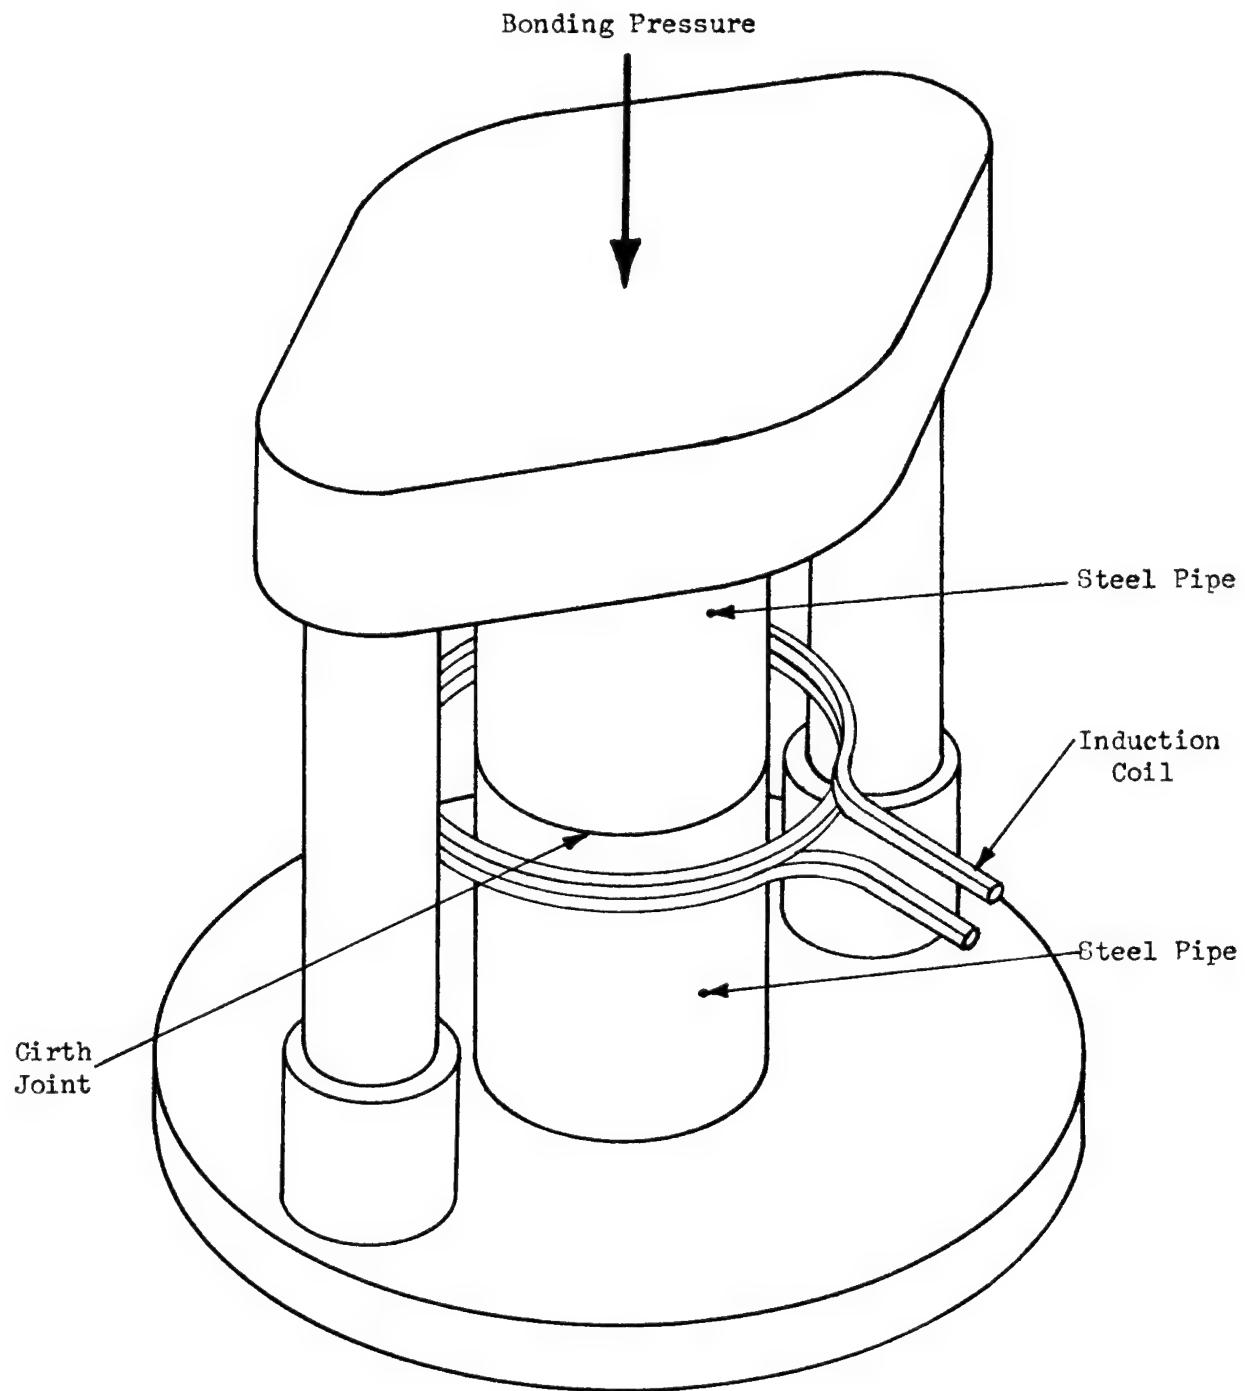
Pressure Welding of Girth Joints in Steel Pipe.
